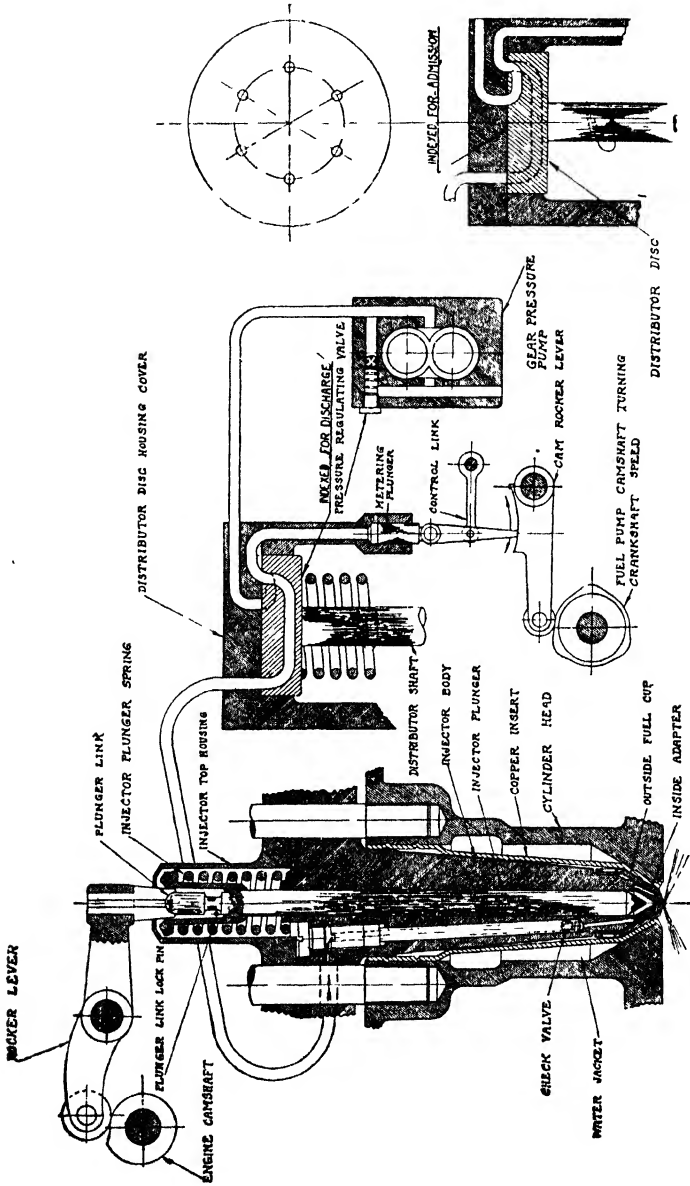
The Complete Fuel Injection System of the Cummins Engine.
